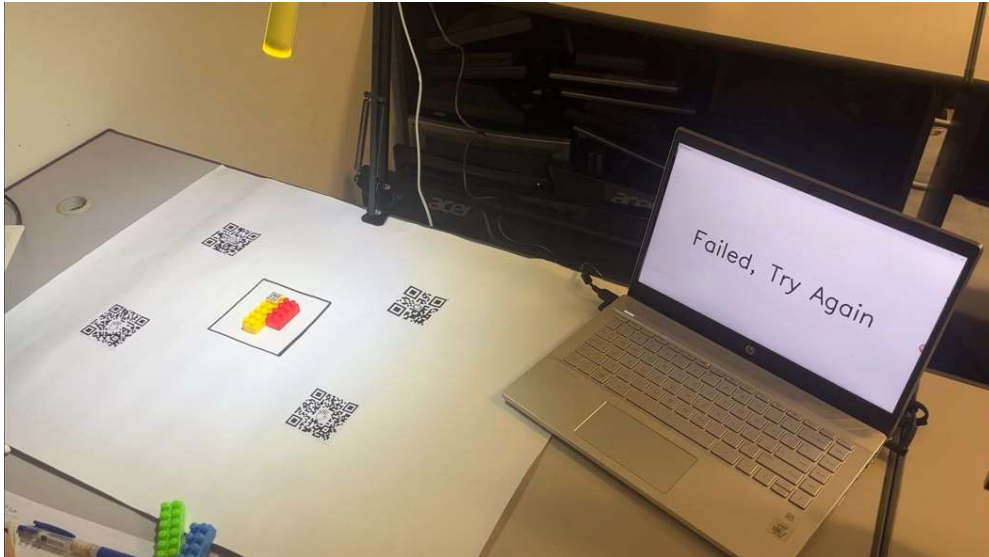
An example of the system correctly checked a wrongly assemble product.
